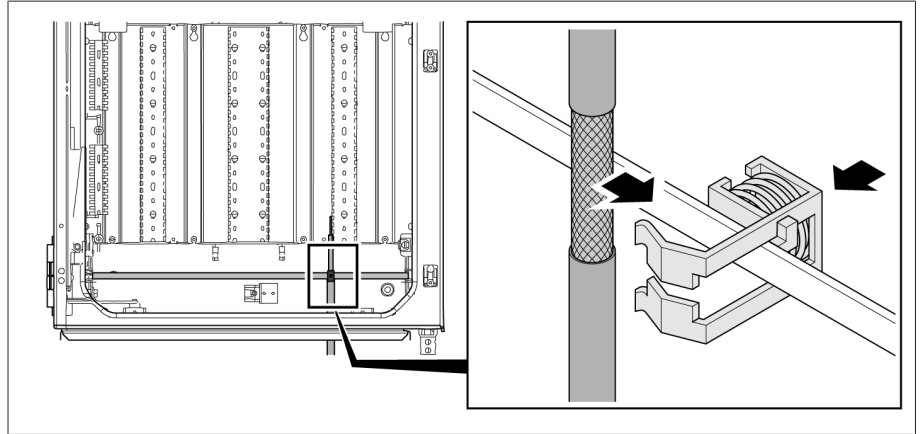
Placing the cable shield with clamping bracket on the earthing bar
